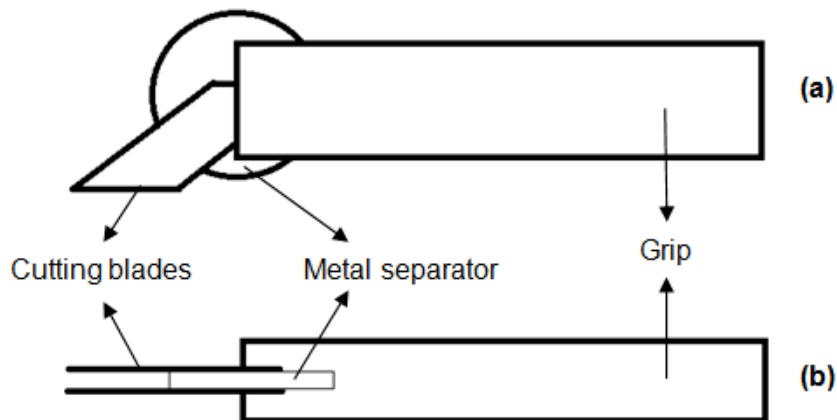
Assembly of cutting tool components: (a) Side view. (b) Top view
